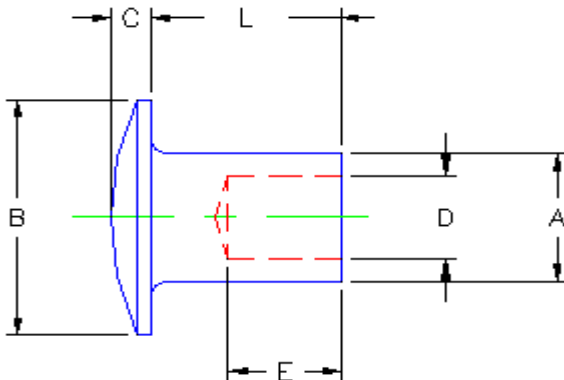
Body diameter(A), head diameter(B), head height(C), hole diameter(D) and hole depth(E) of the rivet
